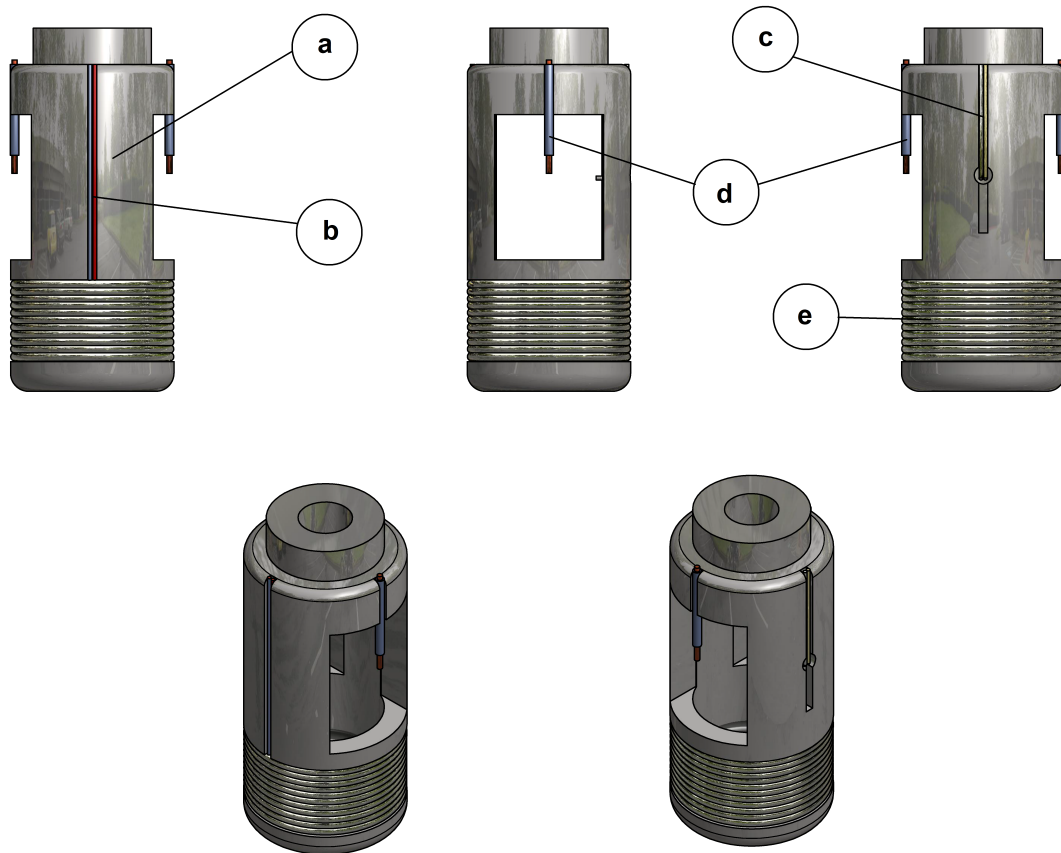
Sample holder enclosure. a) Body of the enclosure. b) heater wires. c) Thermocouple wires. d) Coaxial wires. e) Heater strip.
